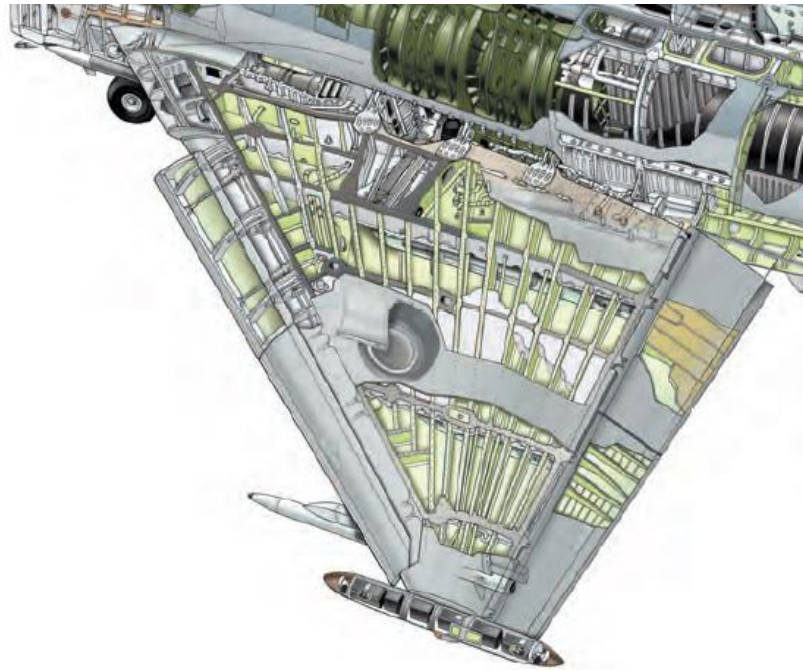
Eurofighter Typhoon Wing Cutaway Drawing [23]
